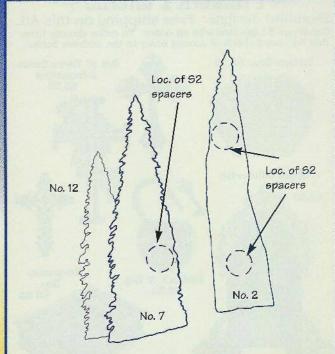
Glue piece No. 12 directly to the backer board, then fasten the spacers to pieces No. 2 and 7. Glue those in place.
